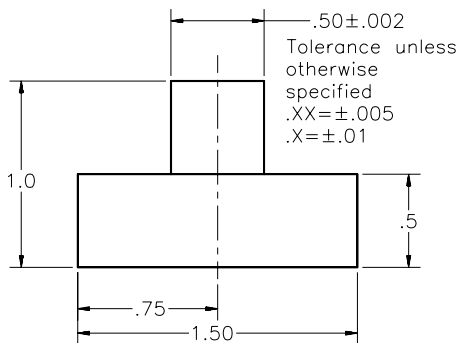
Traditional dimensioning and tolerancing technique
